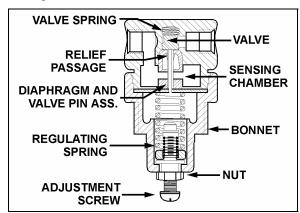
AIR PRESSURE REGULATING VALVE 12141B
